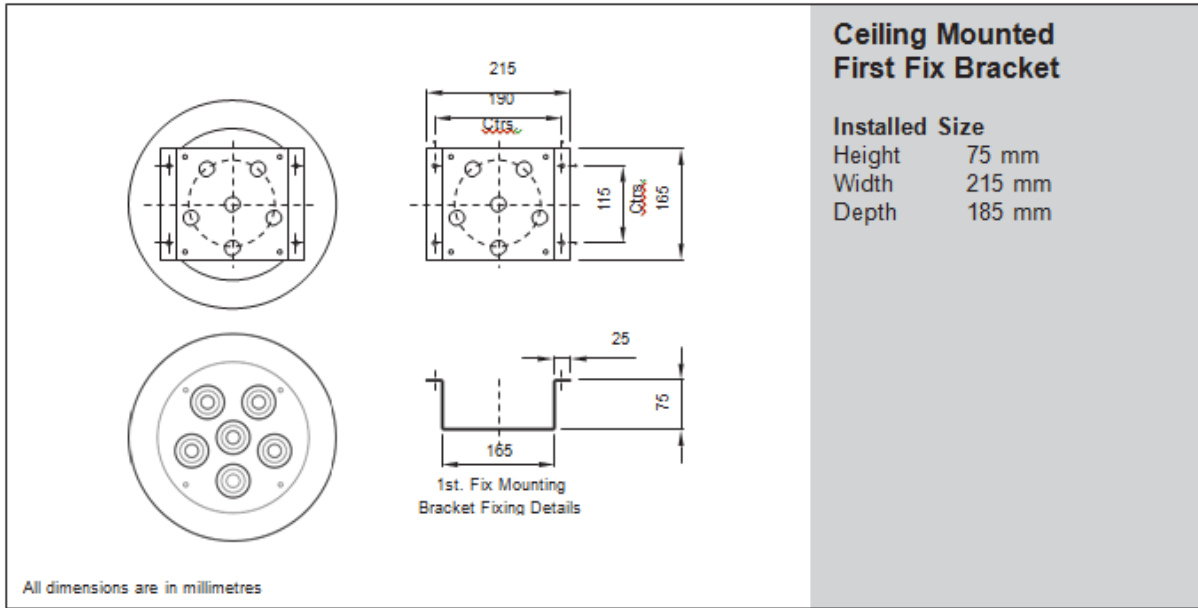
Flexible Pendant First Fix Bracket Installation Detail
